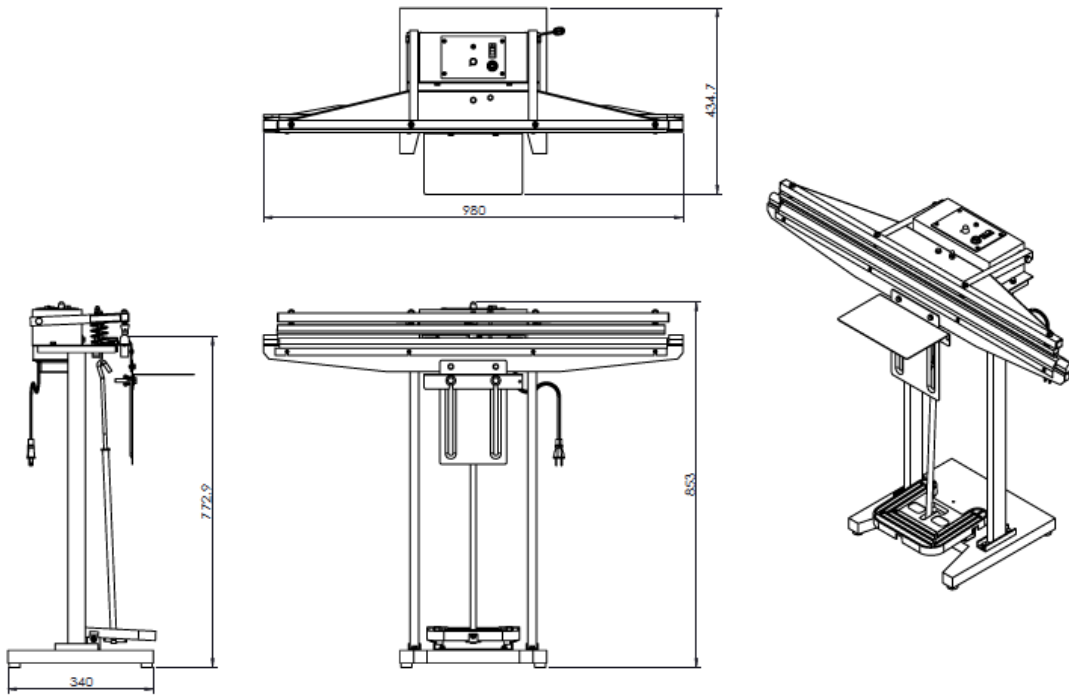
WN-950F Foot Sealer Dimensions - measurements are in mm
